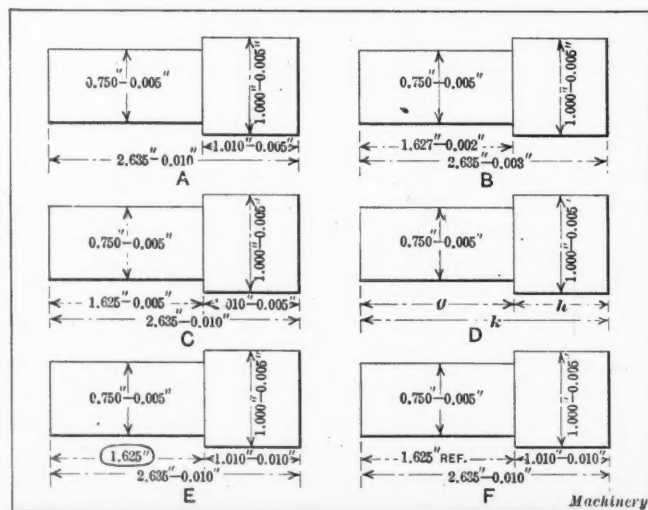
Illustration showing Importance of giving Tolerances for those Dimensions Only which are to be gaged
